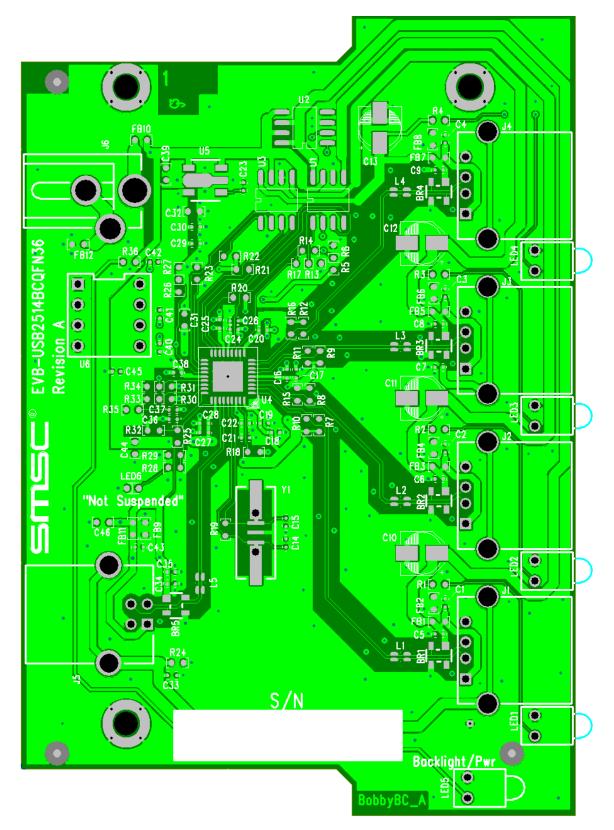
EVB_USB2514B Top Layer - Component Side
